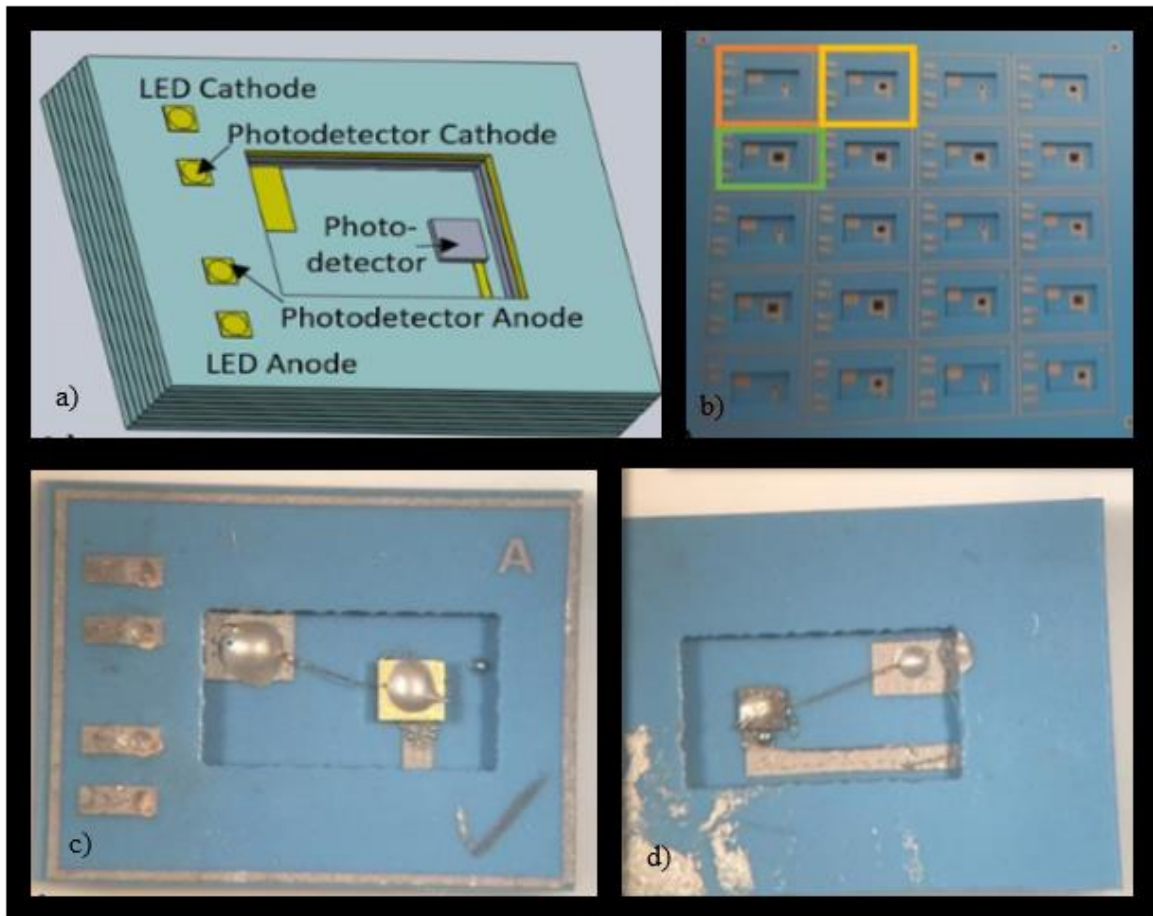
LTCC Design 2. A) Solid-Work design before fabrication. B) LTCC Panel with the designs. C) LTCC model after fabrication and assemble front side. D) LTCC model after fabrication and assemble backside.
